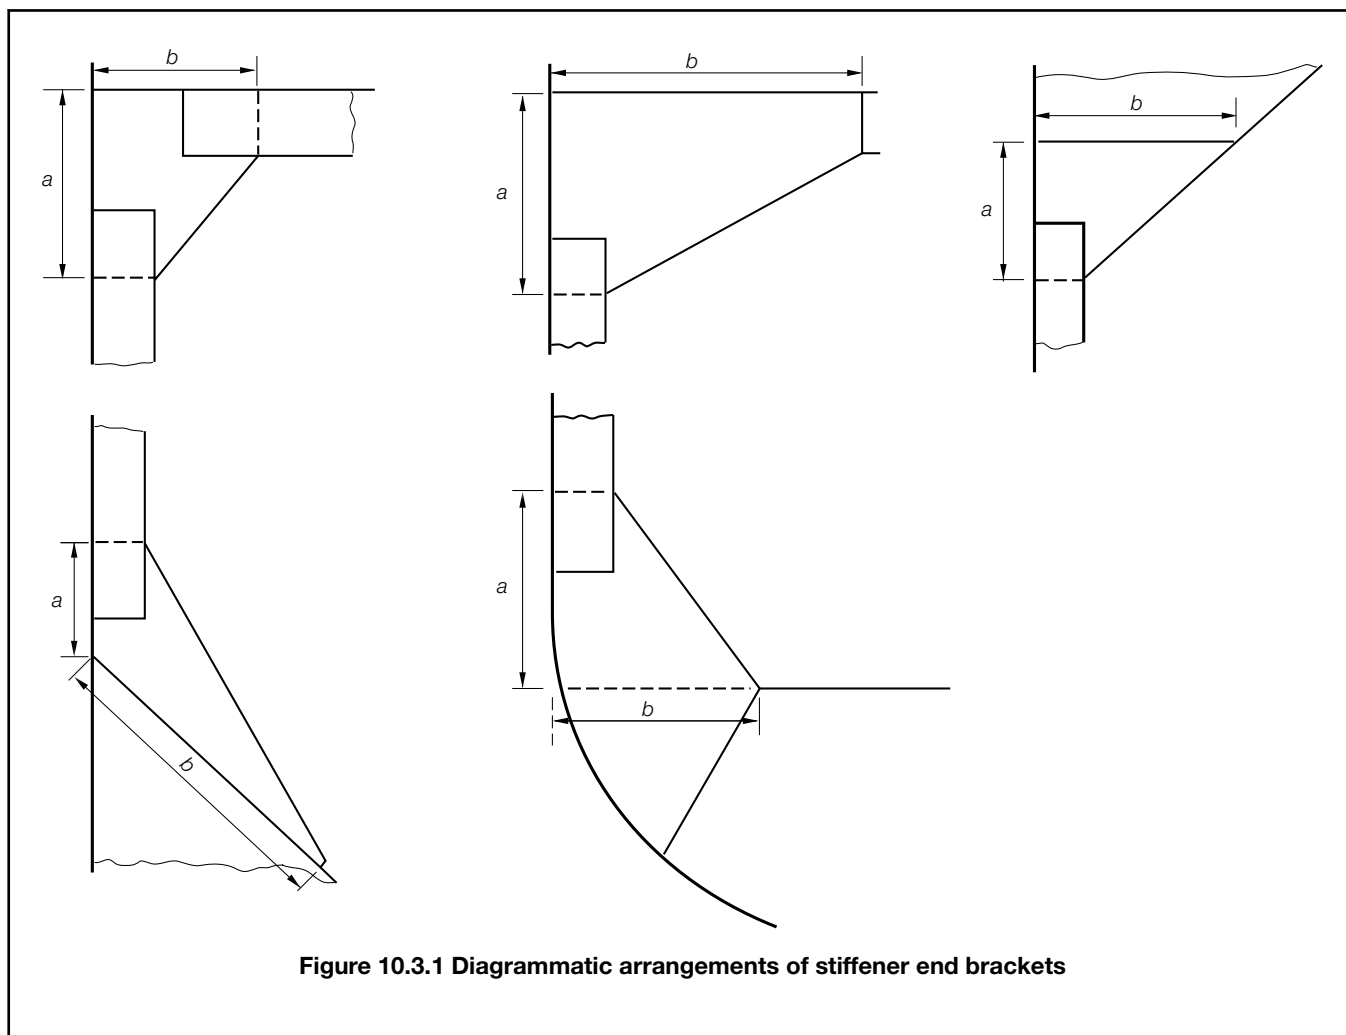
Diagrammatic arrangements of stiffener end brackets
